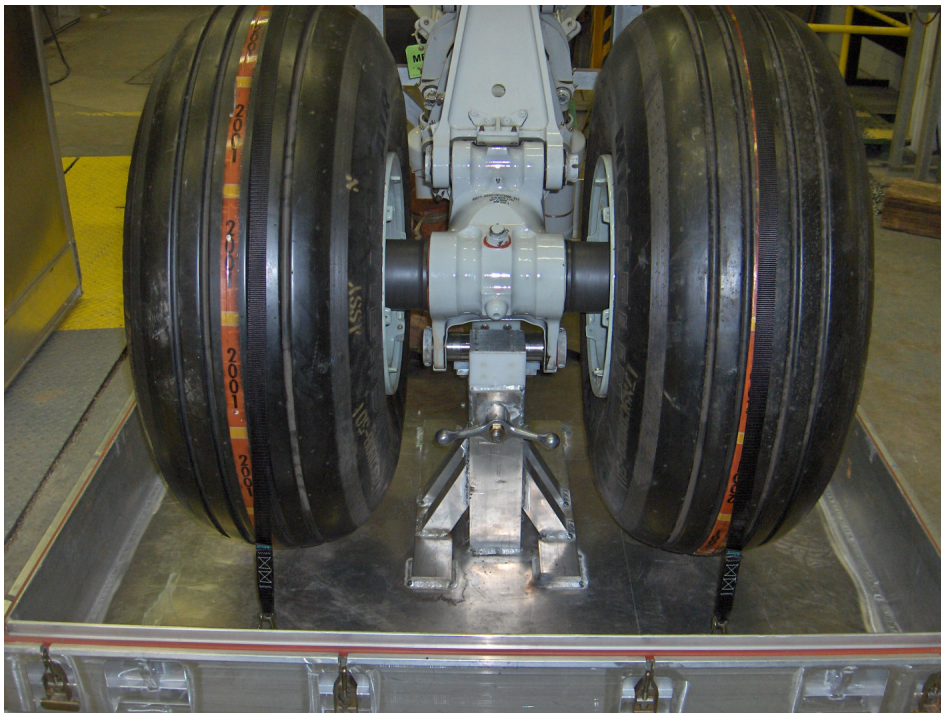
Two aft clamps and one forward clamp hold the gear in place. Nylon straps prevent the tires from rotating.
